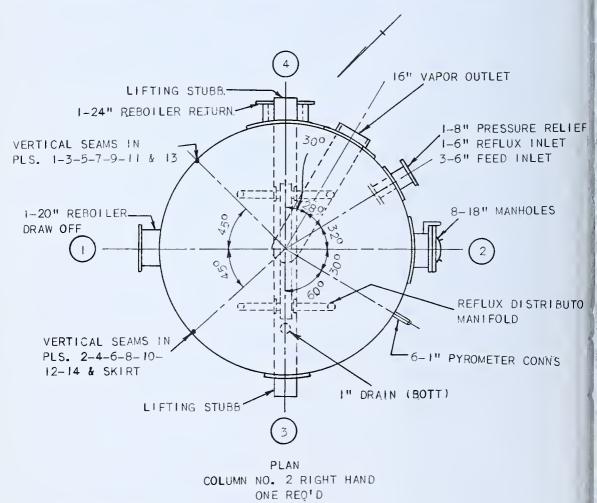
End View of Cylindrical Tank Made the Opposite Hand to Fig. 448
